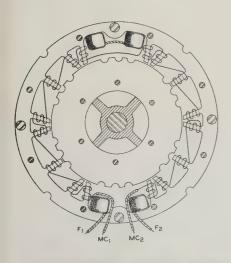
Cross section of stator and rotor assembly, showing arrangement of teeth and windings of "low tone" channel of tone alternator
